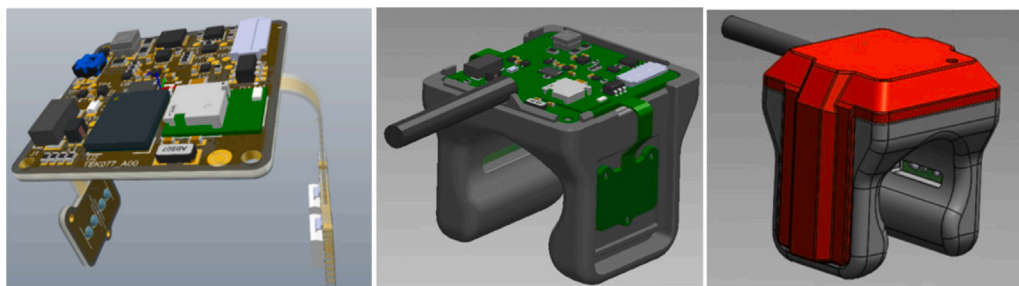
Mechanical design and integration of the ring oximeter. (Right) Rigid-flex PCB with LEDs and photodiodes at 90° angles for transmission-mode alignment. (Middle) Internal enclosure showing PCB modules and embedded thermal bridge. (Left) Final assembly with protective shell, designed for prolonged wear and stable alignment.
